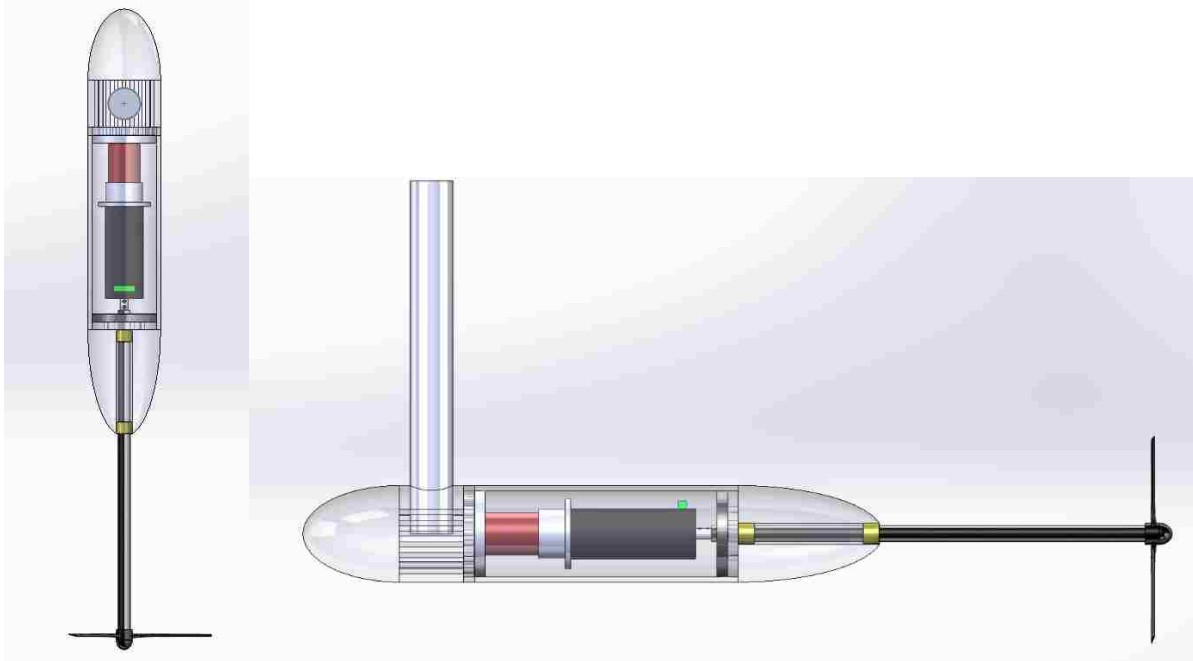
Top View Model Turbine CAD & Figure 3: Side View Model Turbine CAD
